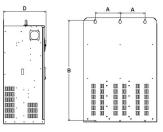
JAC300 series sheet metal structure dimensions and installation dimensions
